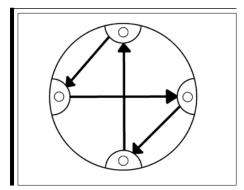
| Tighten motor bolts evenly in a cross pattern.
